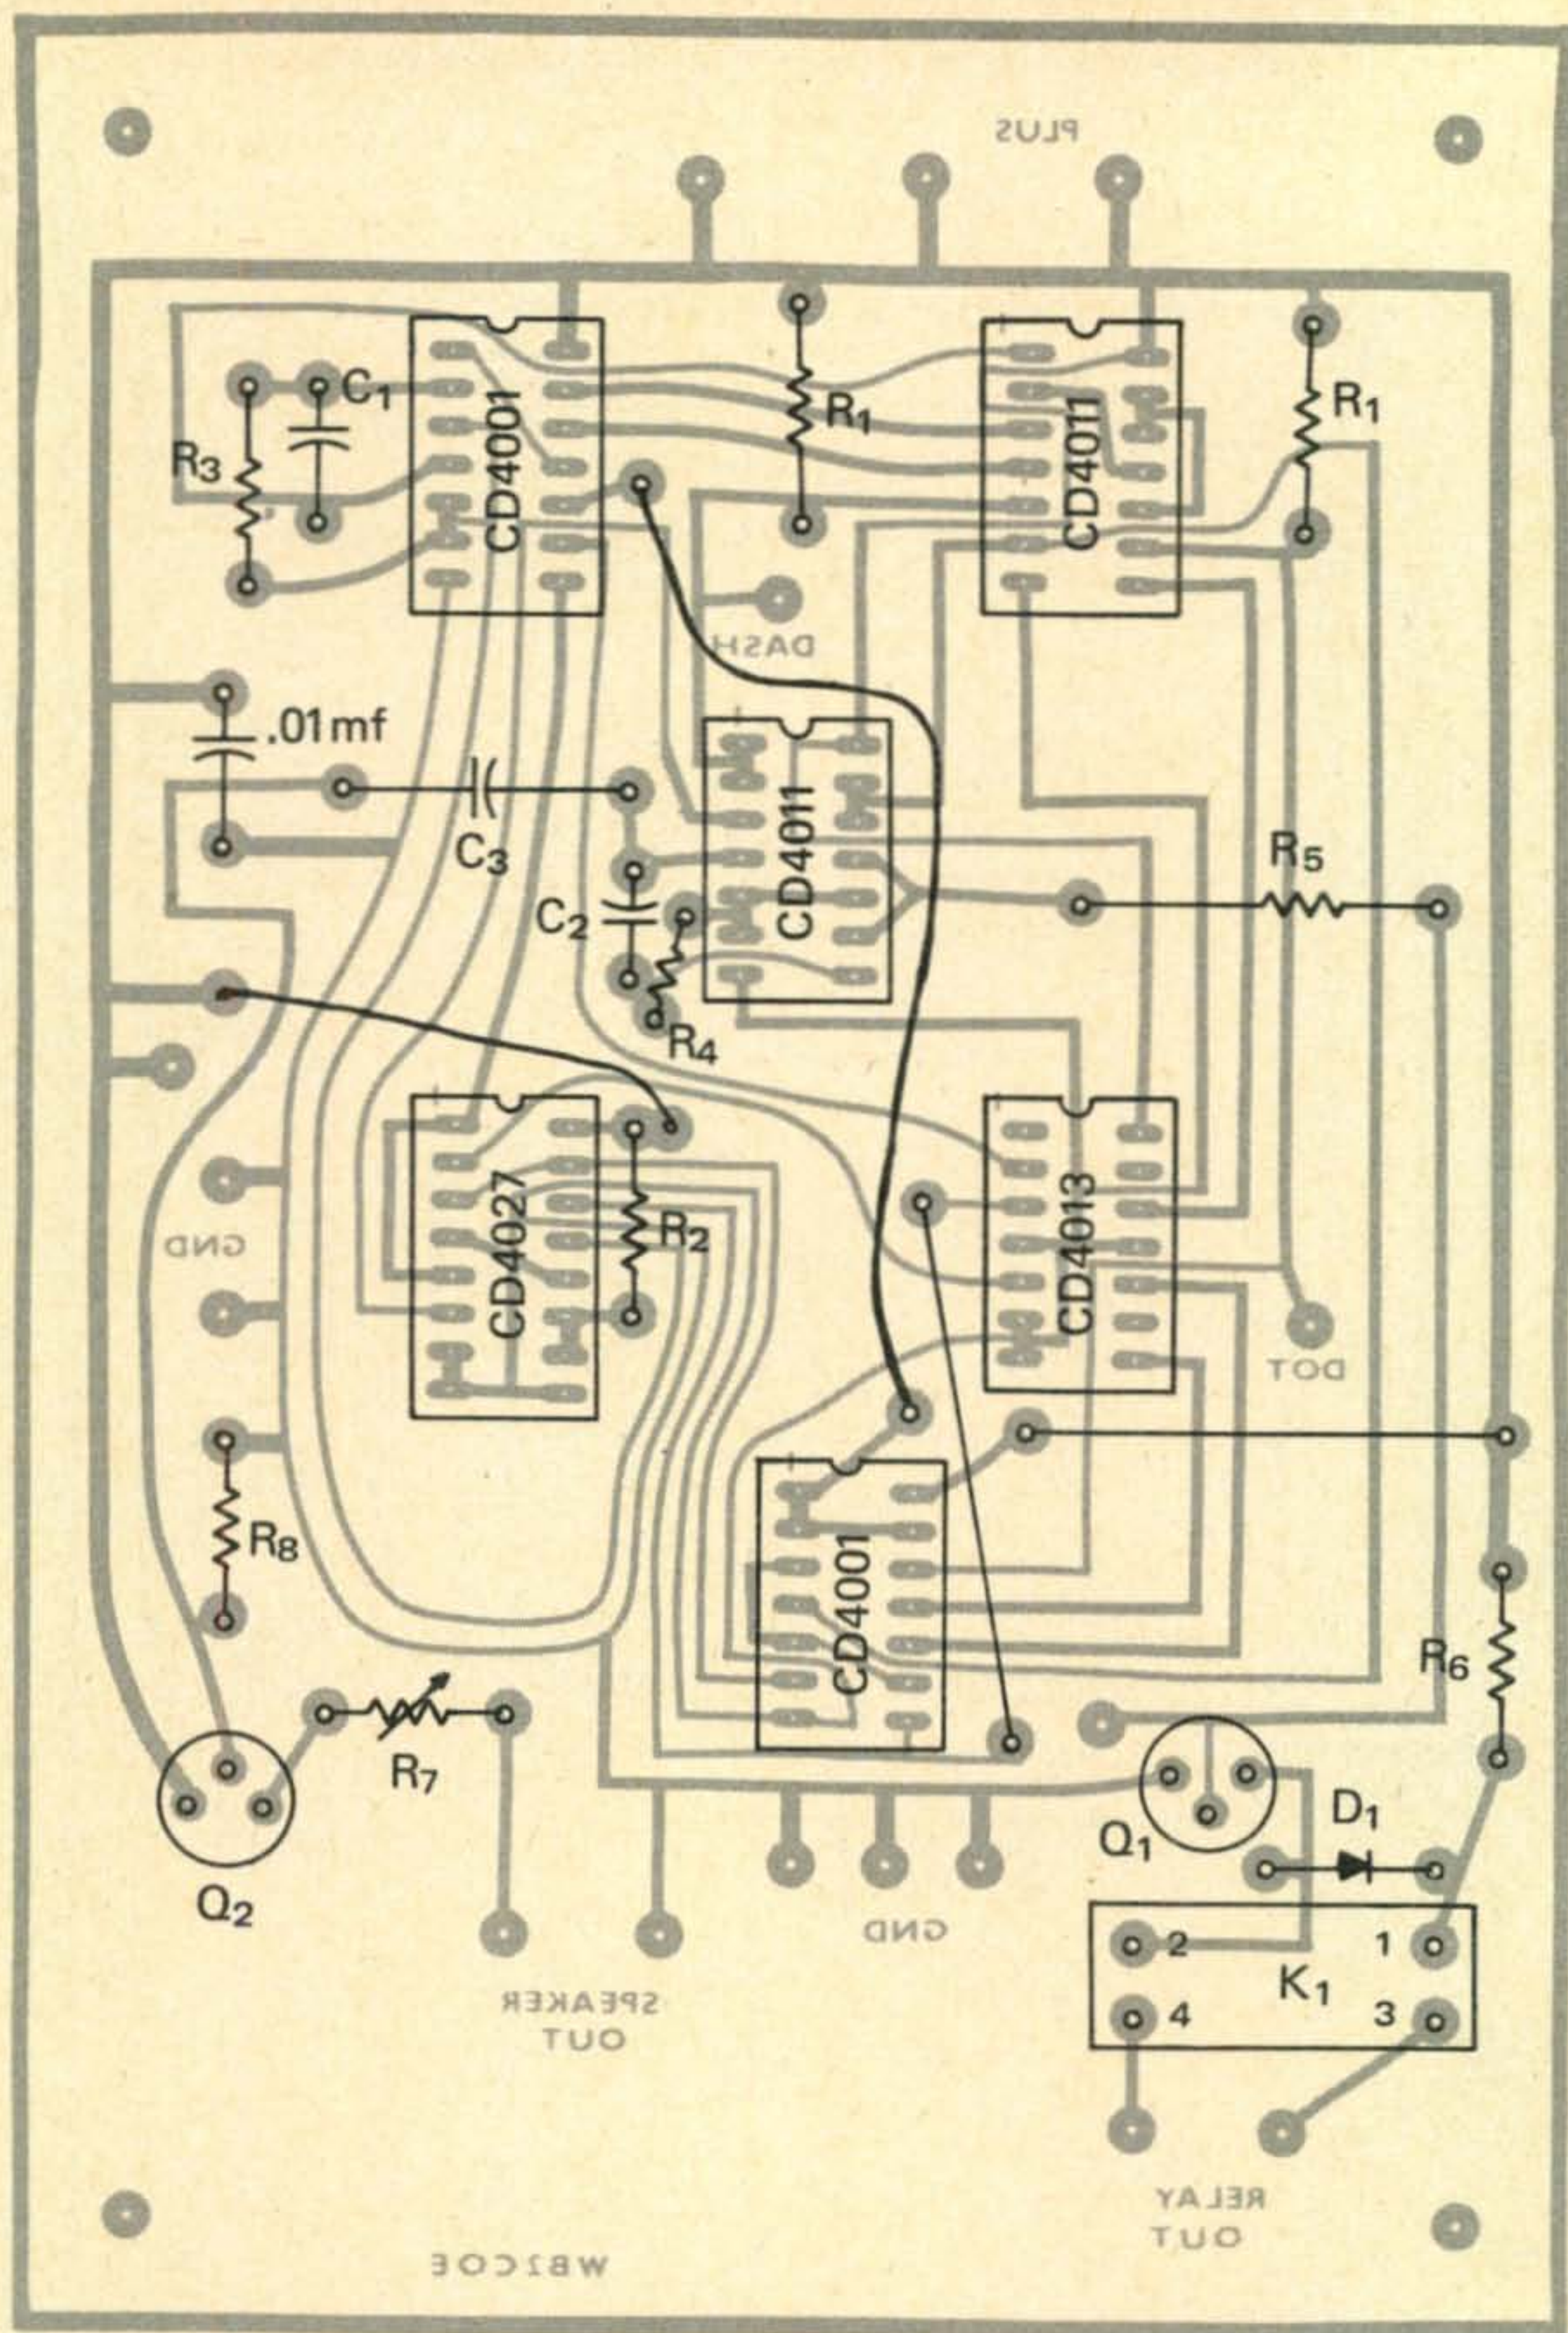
B—Full-size parts layout for Version II keyer, component side.
